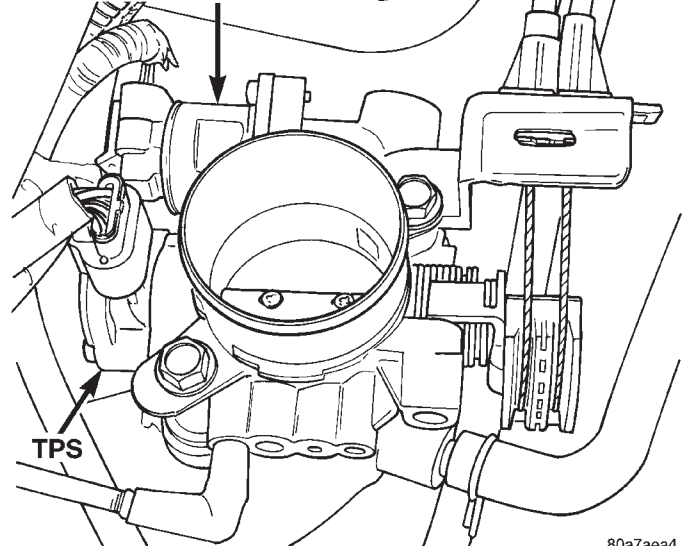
Throttle Position Sensor and Idle Air Control Motor
